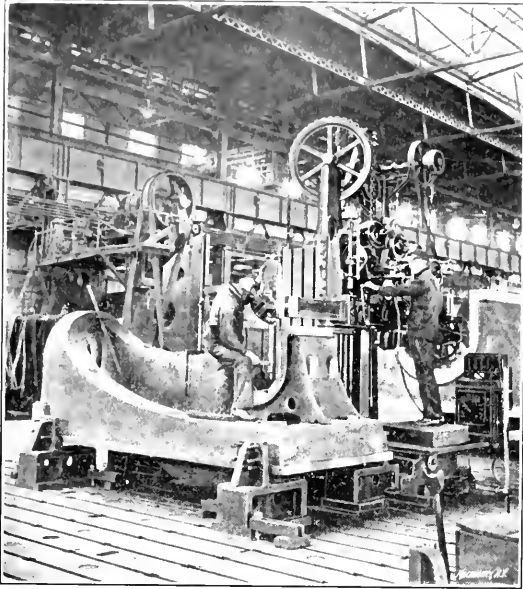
Morton Shaper Finishing Main Bearing Seat.
